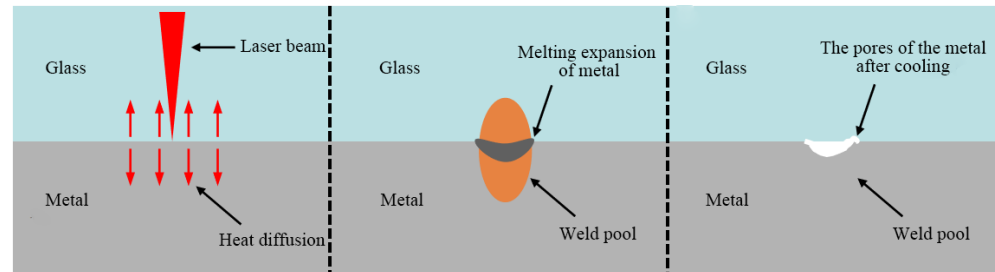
A schematic diagram of the welding process shows the fracture surface on the metal side.
